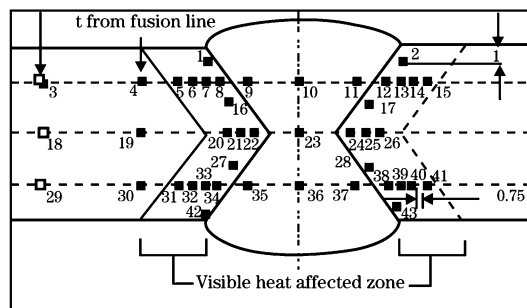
Schematic of weldment cross-section demonstrating different sub-zones for hardness measurement
